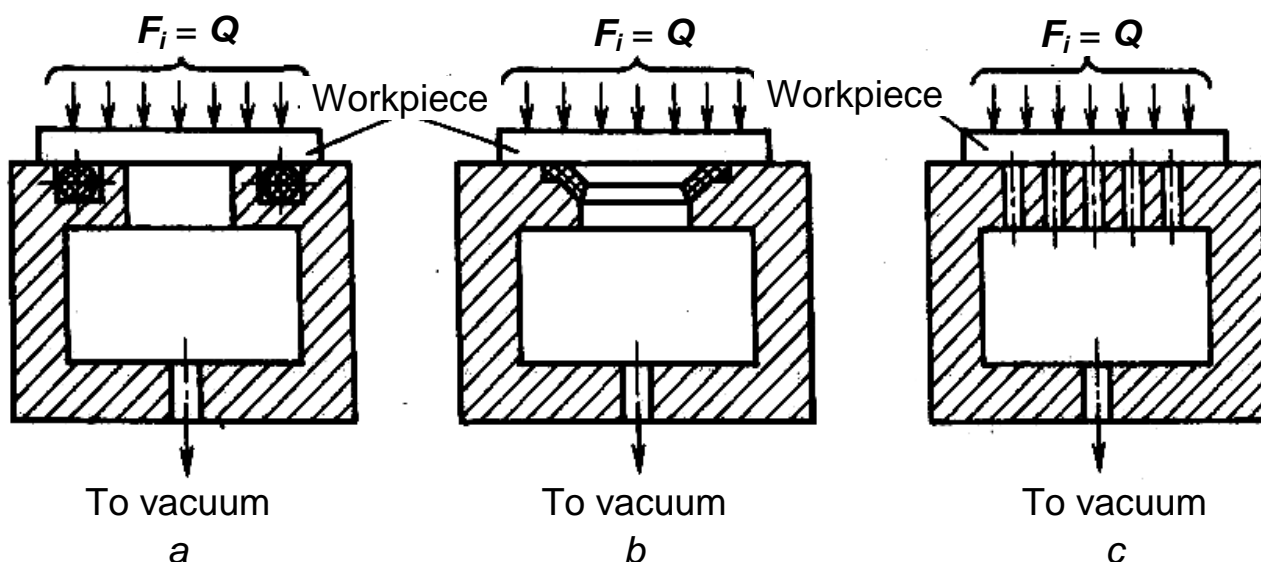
Schematic diagrams of vacuum drive: *a* – with rubber ring; *b* – with rubber strip; *c* – without seal
